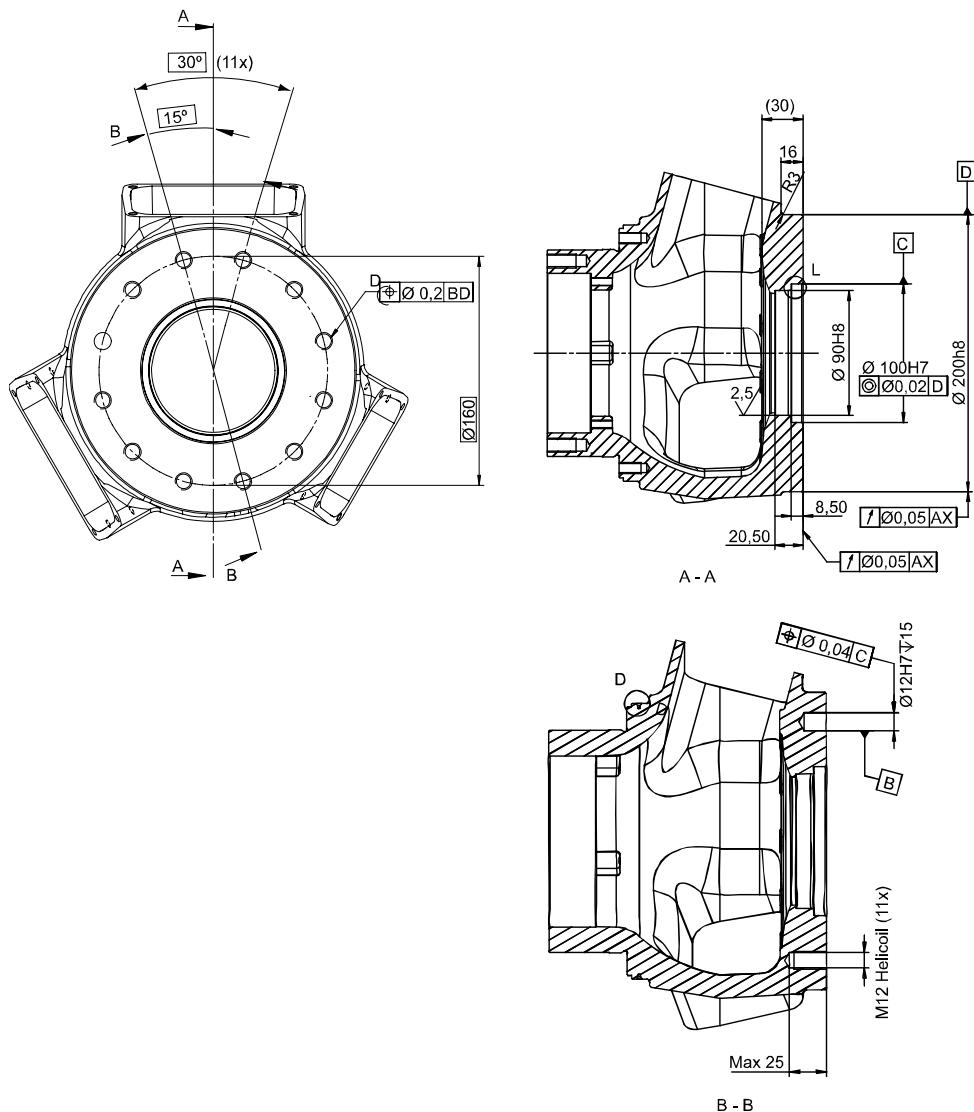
Robot tool flange SS-EN ISO 9409-1:2004 (dimensions in mm).
